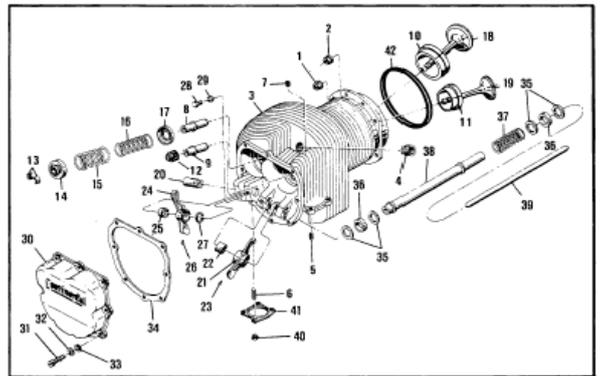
CYLINDER ASSEMBLY MODELS IO-470-C,D,E,F,G,H,L,M,N,P,R,S,U,V
